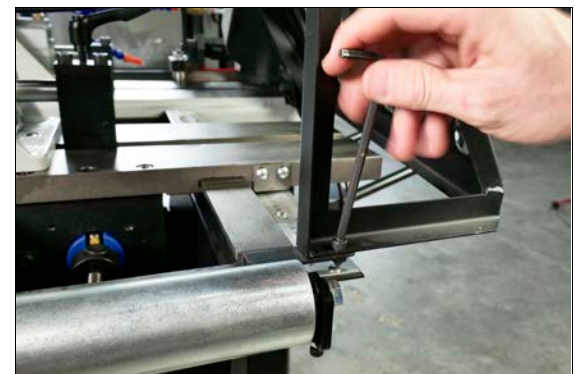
Removing the shipping bolts from the rear cage and the frame.
